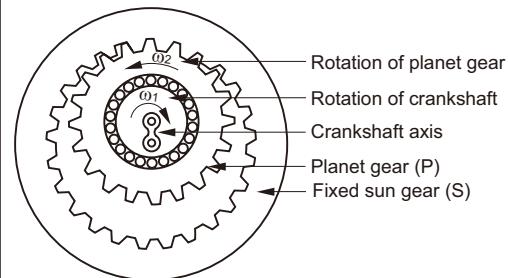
Epitrochoid Planet Gear-Circular (PIN) Tooth Sun Gear Combination
